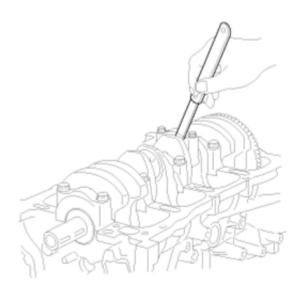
Measuring Connecting Rod End Play Courtesy of KIA MOTORS AMERICA, INC.
